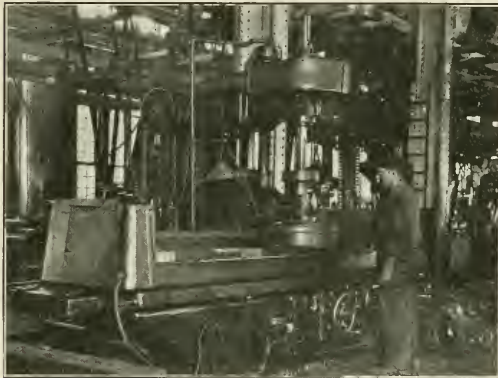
Surface Grinder Equipped with Magnetic Chuck; Can Be Used for Finishing Links, Main Rods and Many Other Parts
